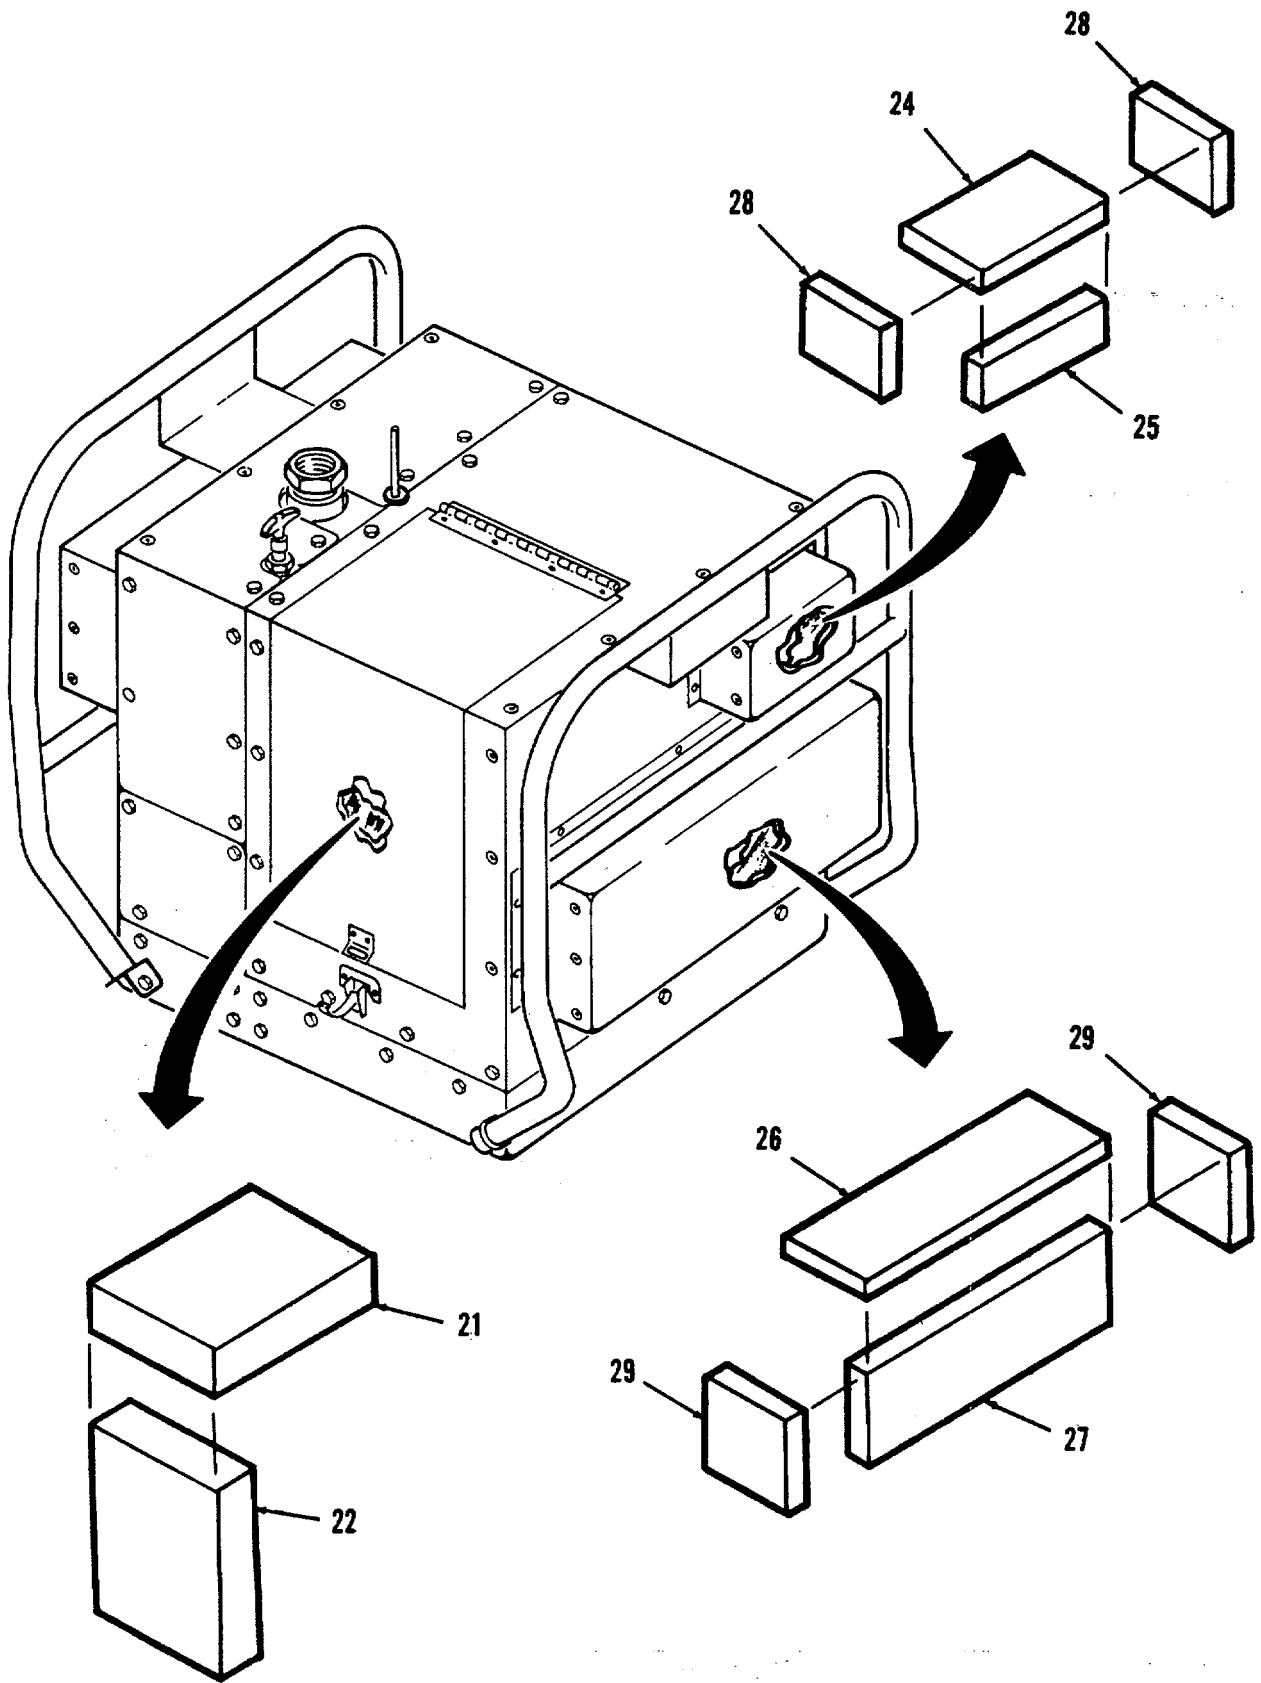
Enclosure Assembly Inlet Side (Sheet 3 of 3)
